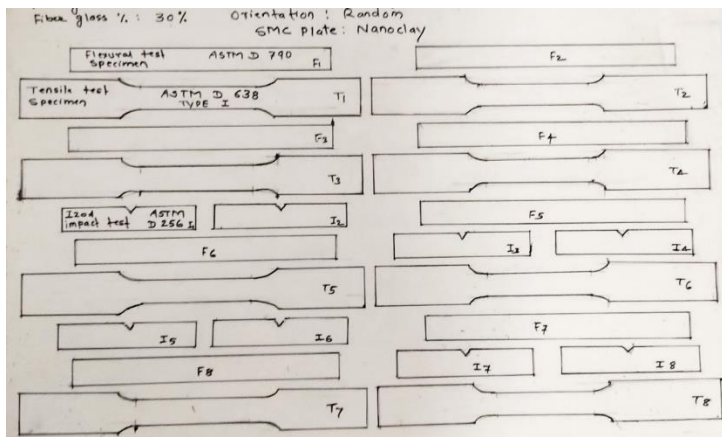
Layout of the samples from a sheet needed for tensile (T) and flexural (F) tests
